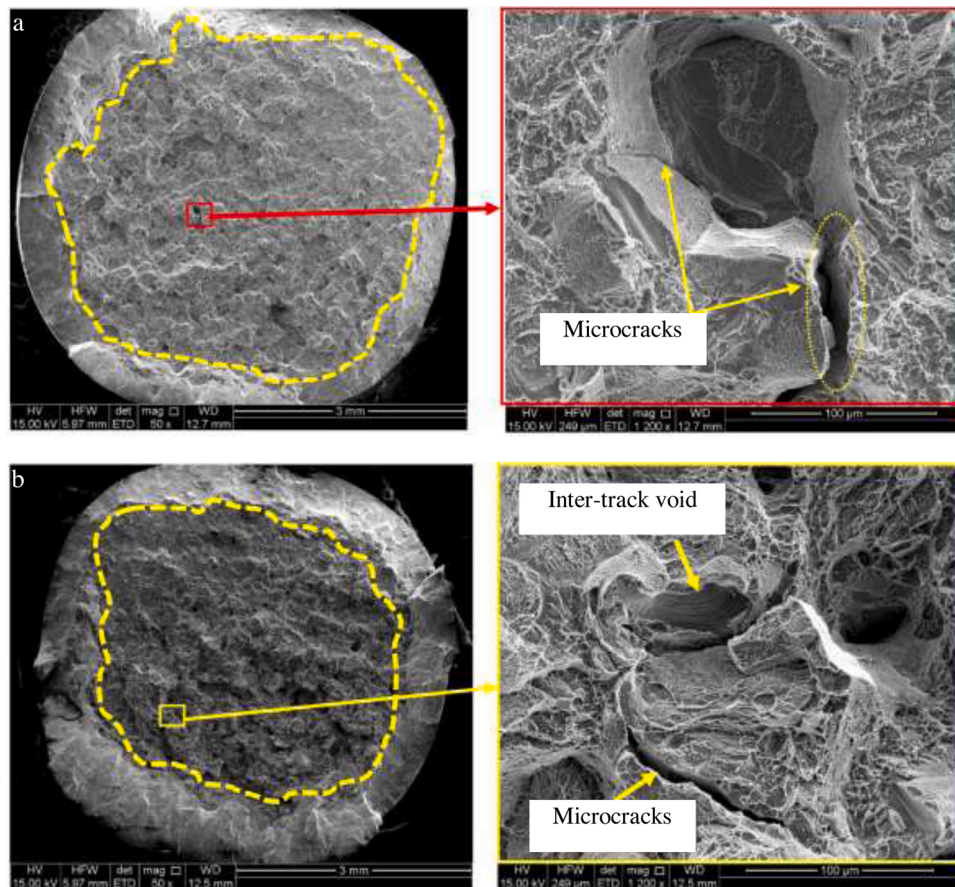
SEM micrographs of the fracture surfaces of a) machined vertical with microcracks inter-connecting between layers. The broken lines show the borderline of the shear lips regions and bulk fracture surfaces on the machined tensile samples, and b) machined horizontal with a typical inter-track void and microcrack.
